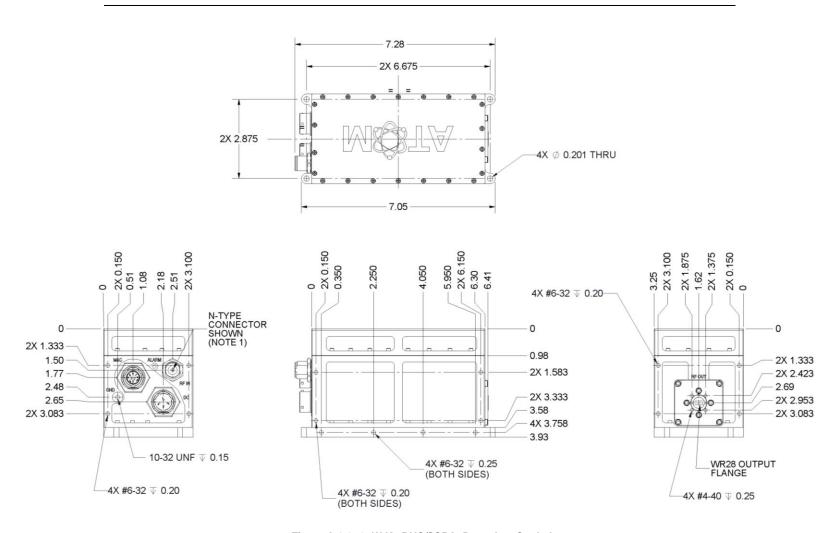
25W Ka BUC/SSPA, Baseplate Cooled
